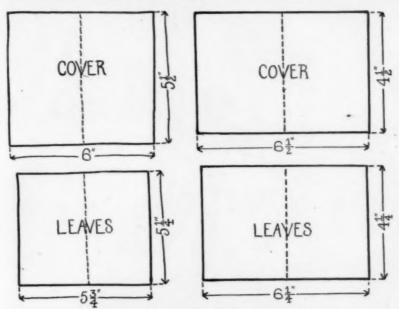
Plate I. Freehand sketches and accurate working drawings such as children should produce as a guide in book making.
